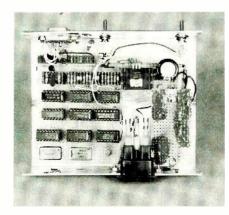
THE AUTHOR'S PROTOTYPE. Perforated construction board and wirewrap techniques were used to assemble the project.
